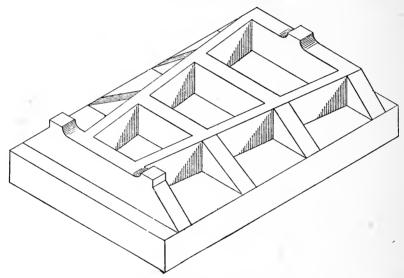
STANDARD SURFACE PLATE: UNDER-SIDE, SHOWING RIBS.
